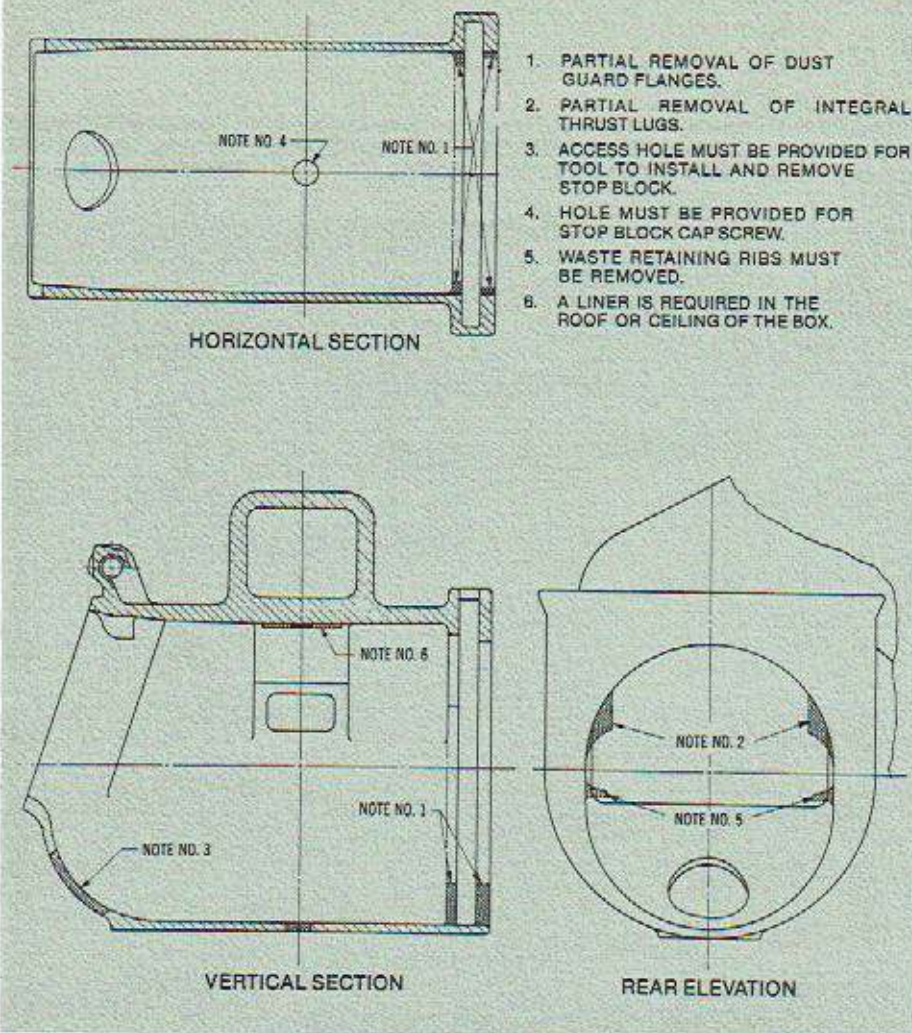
This shows the design of the integral box used with friction bearings and how it can be modified to apply the "AP" bearing so it is not necessary to replace side frames under existing cars. →
